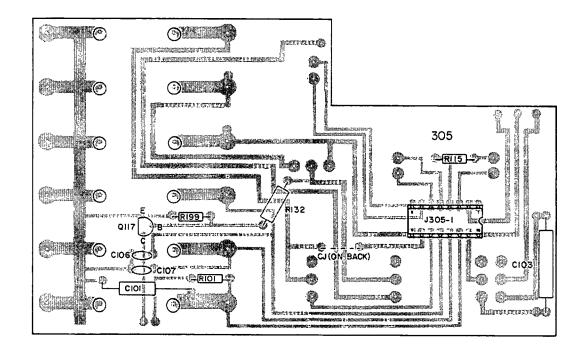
P.C. BOARD ASSEMBLY, BOARD 304, DRAWING
